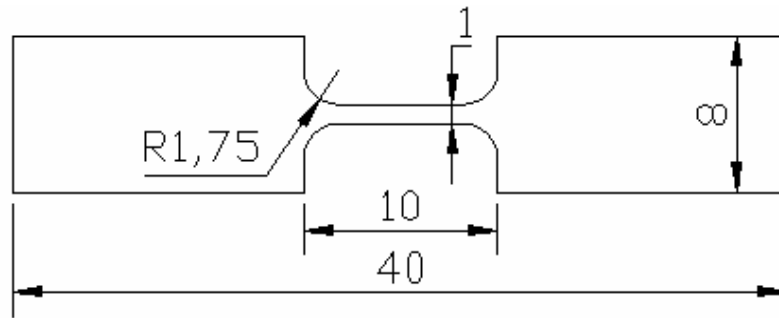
Mechanical drawing of tensile test specimen. Unit in mm
